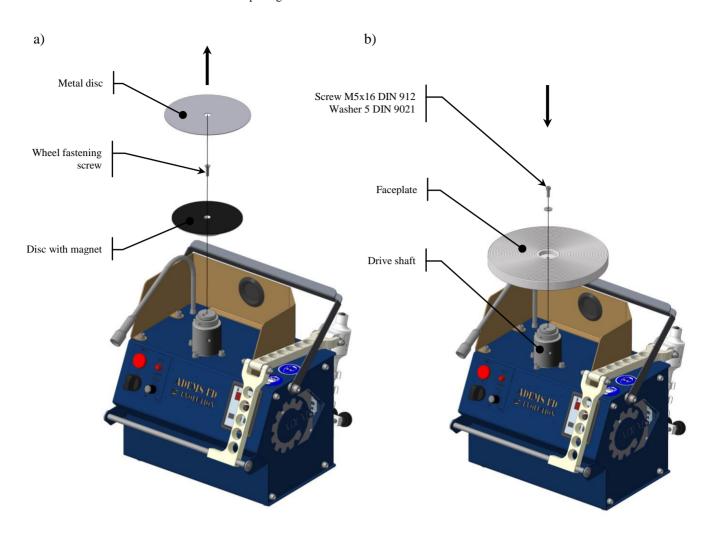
Preparation of a machine for knife packages sharpening a) Dismantling of disc with a magnet; b) Faceplate installation
